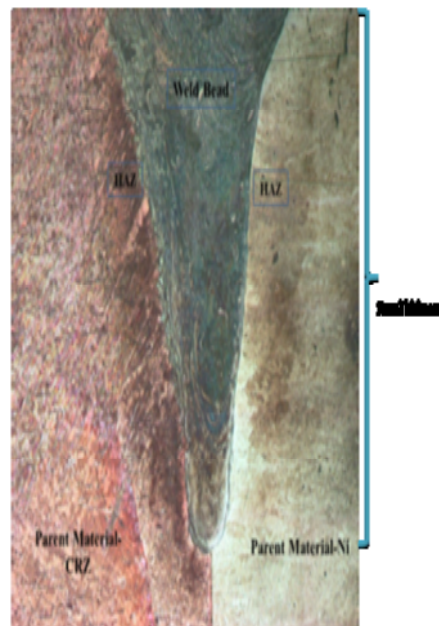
Microscopic view of CRZ-Ni weld specimen
